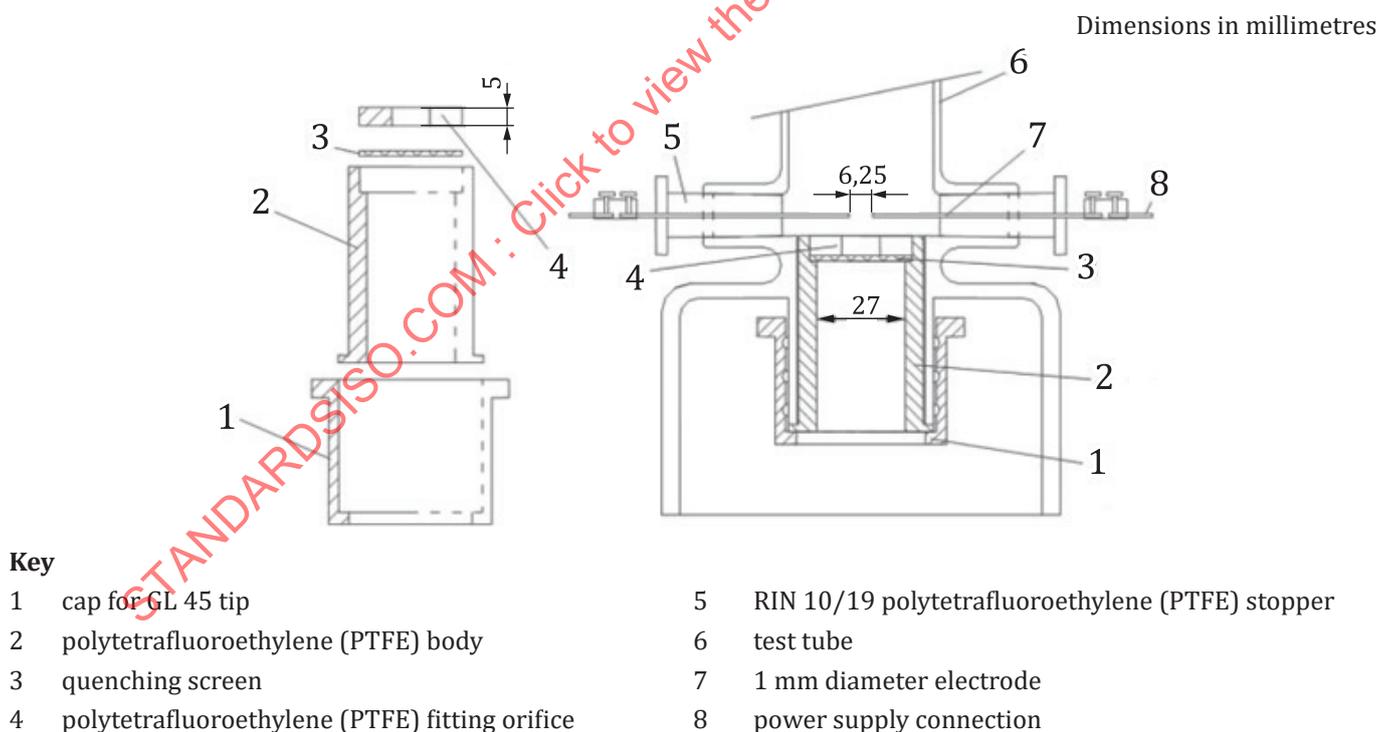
Drawing of the lower end of the tube showing the ignition electrodes and the damping (fitting) orifice
